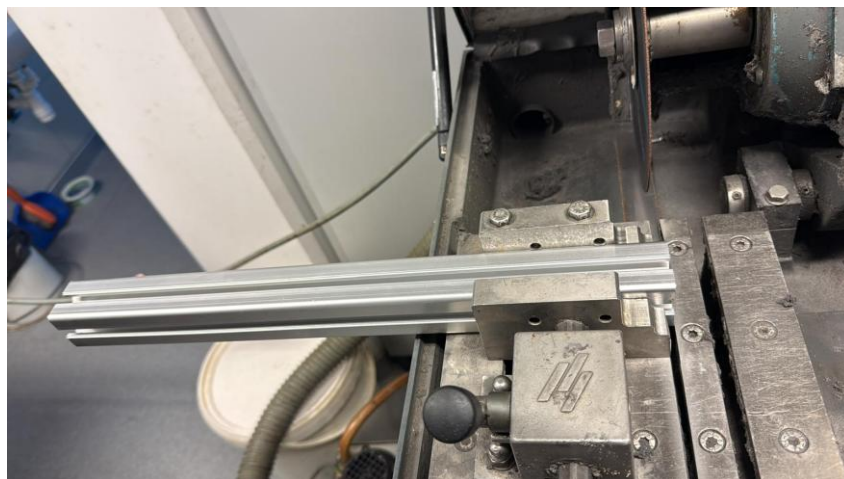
shows the aluminum extrusion being clamped in the machine for cutting.
